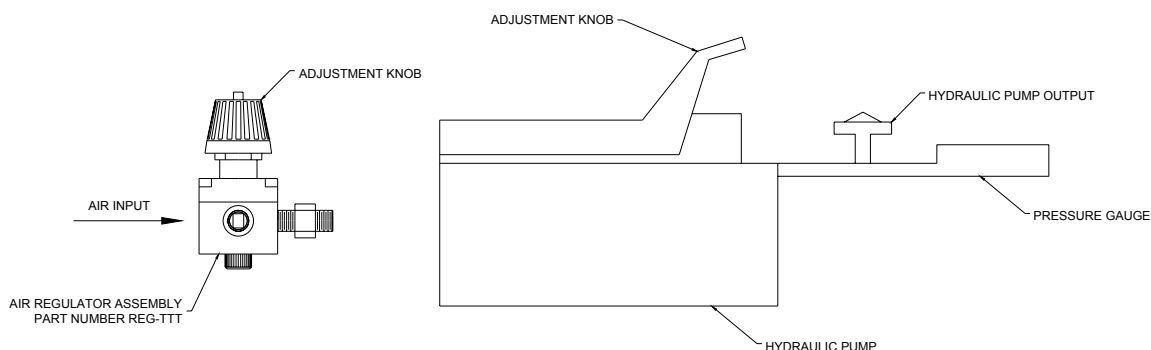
Air Regulator Assembly And Hydraulic Pump
